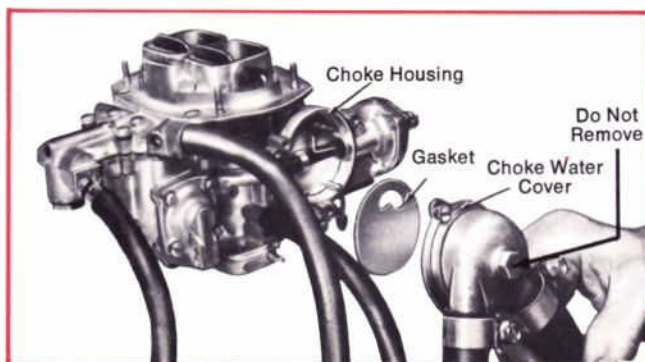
Removal of Choke Cover Assembly Prior to Vacuum Pull Down Adjustment
